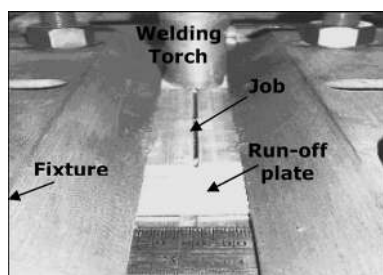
Macro photograph showing joint set-up for preparation of weld joints.
